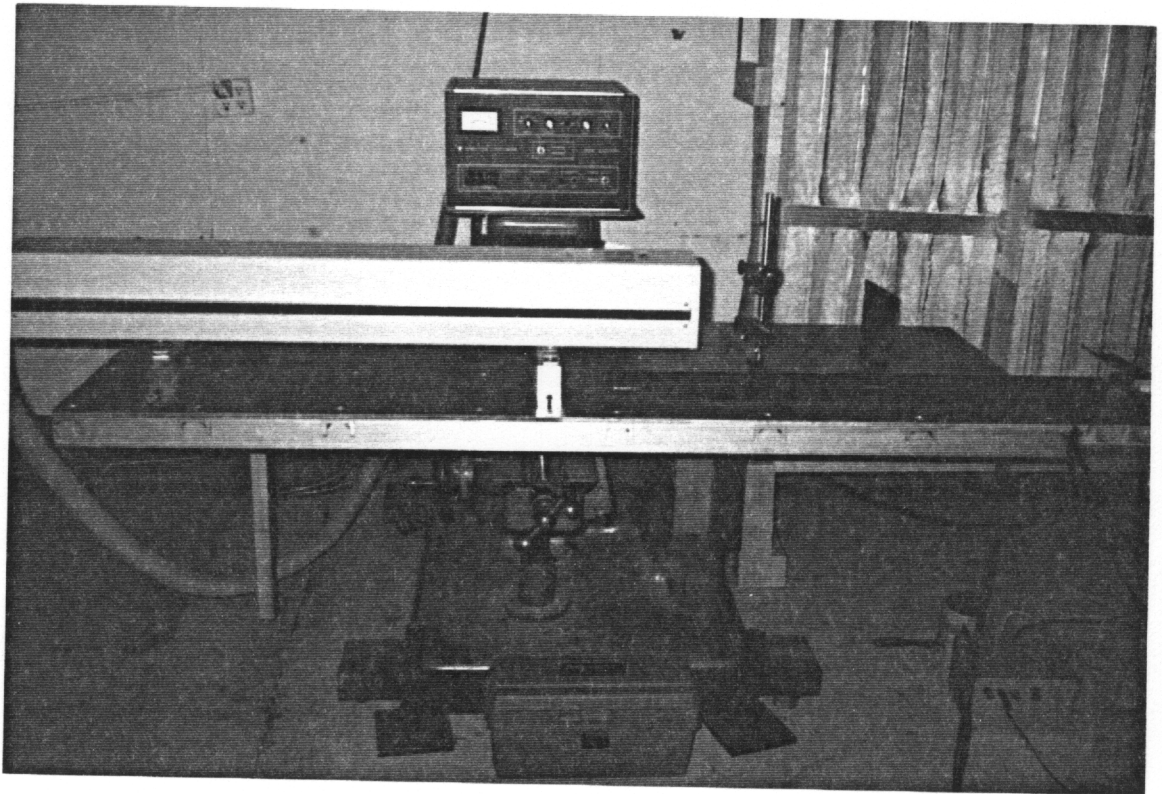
Photograph of laser table mounted to a milling machine traverse; also shown are the laser, beam steerer, and mask attached to an optical rail
